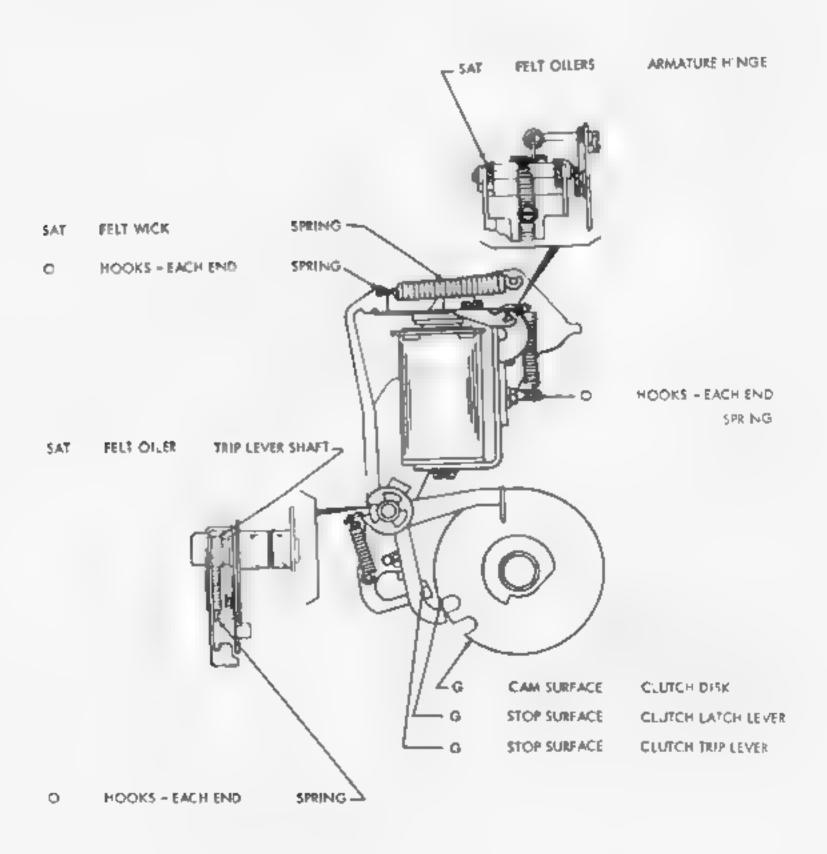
REMOTE CONTROL GEARSHIFT - EUBRICATION (LK26 AND LAK27)
